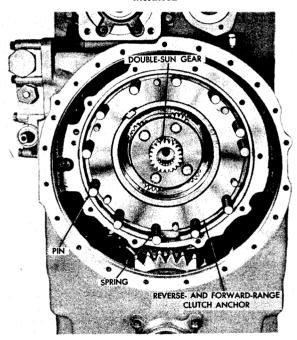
Double-sun gear, springs and pins installed the tangs of the external clutch plate and then through the adjacent spring hole. Then tie the wire or cord to hold the plates in place.
